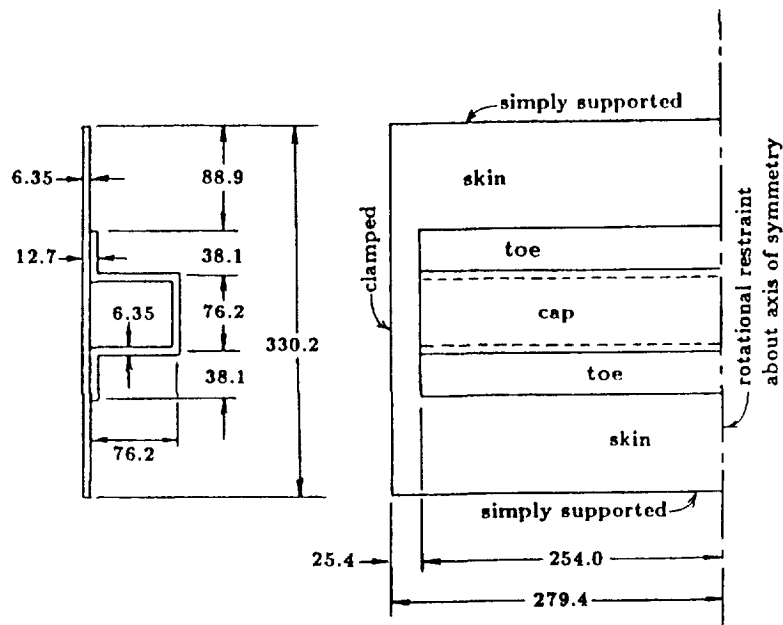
Stiffened Composite Panel AS-4/HMHS $[[0/\pm 45/90]_s]_6$; Cross Section and Plan (All dimensions are in mm)
